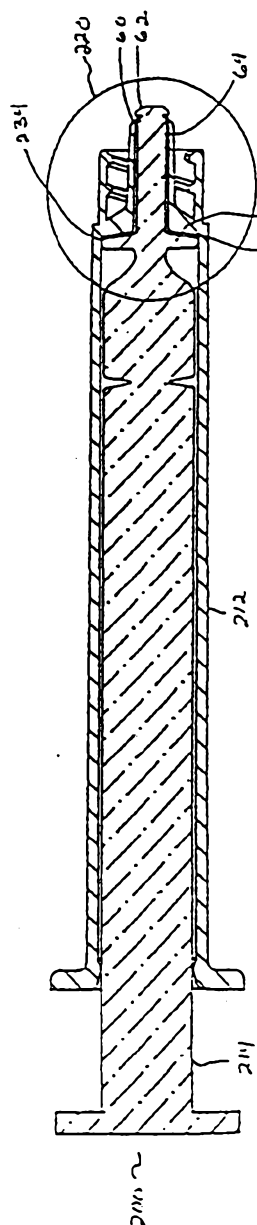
A BARREL & PLUNGER CROSS-SECTION
